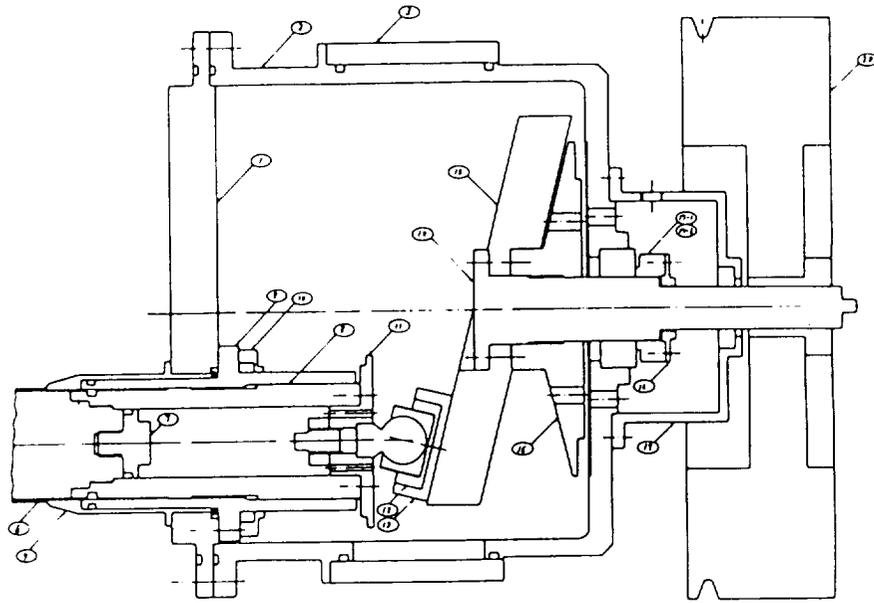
Bottom end of the expansion engine and the swash plate mechanism.
